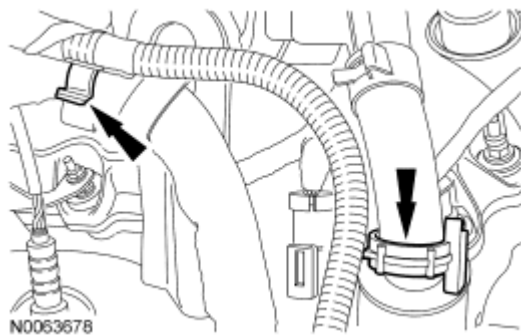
Identifying Block Heater Wiring Harness From Engine
